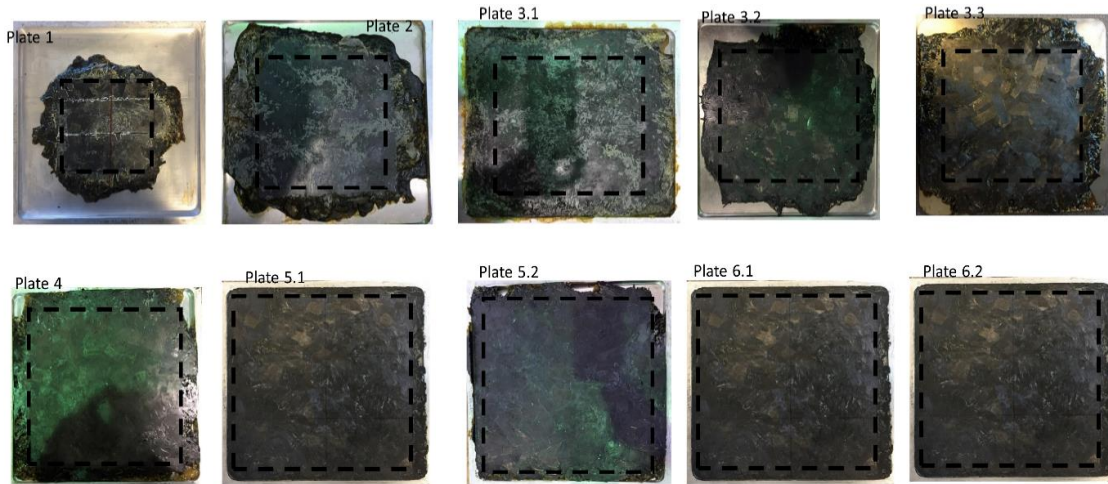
The charge size and its location in the mold before and after molding for plates P1-P6 indicating the ability of the charge to flow and fill the mold
